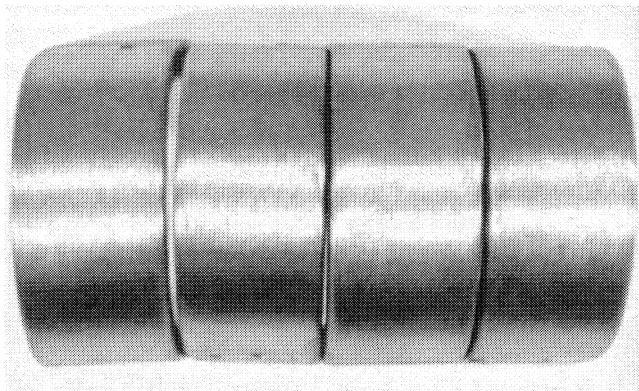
Guided Bend Test Specimens from the Journal Mock Up Repair Test Assembly.
